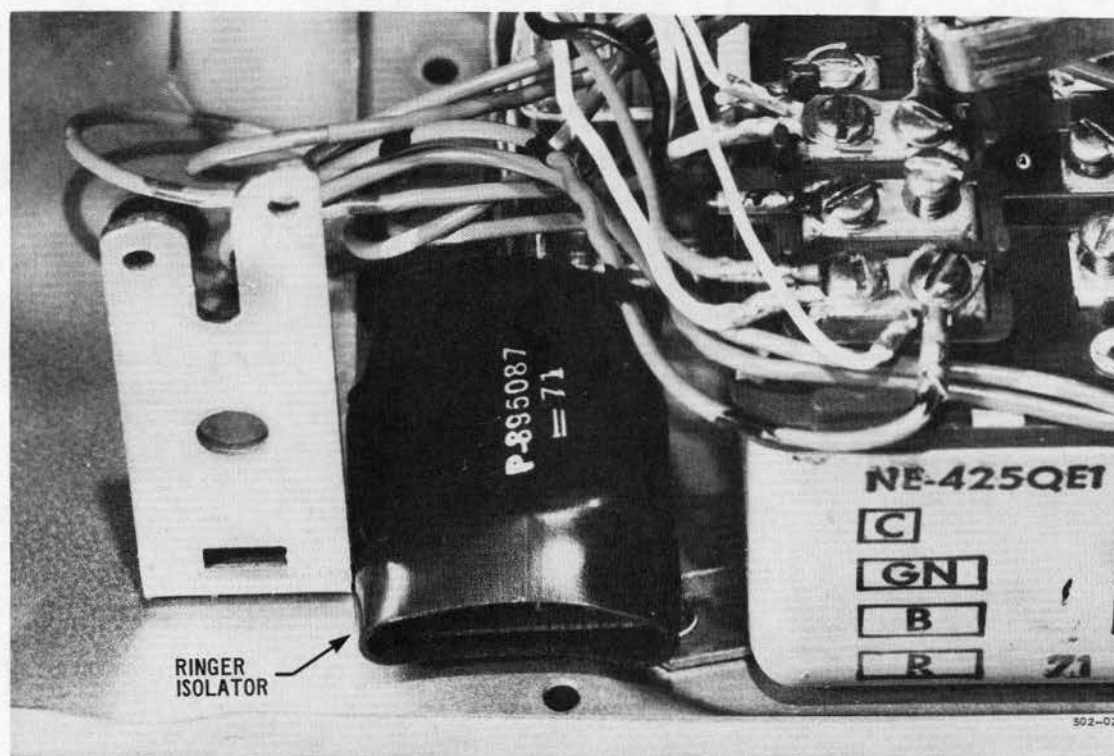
NE-500 Type Telephone Set Showing Method of Mounting P0895087 Ringer Isolator
